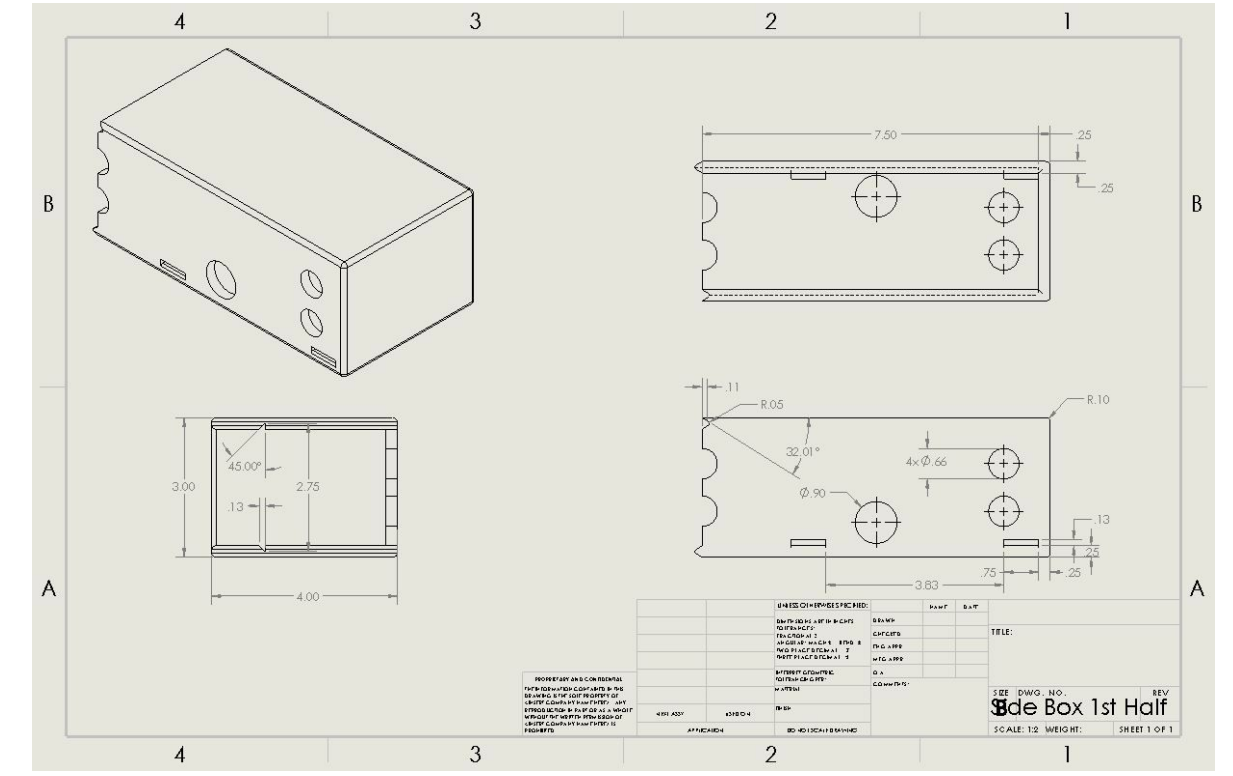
Detailed drawings of half of the side sensor housing for the final prototype.
